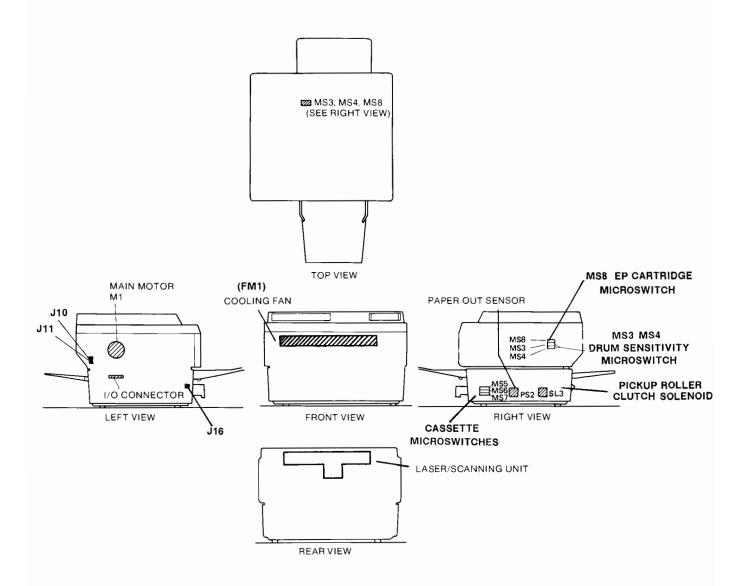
Electrical Component Layout HP 2686A (part 2 of 3)
